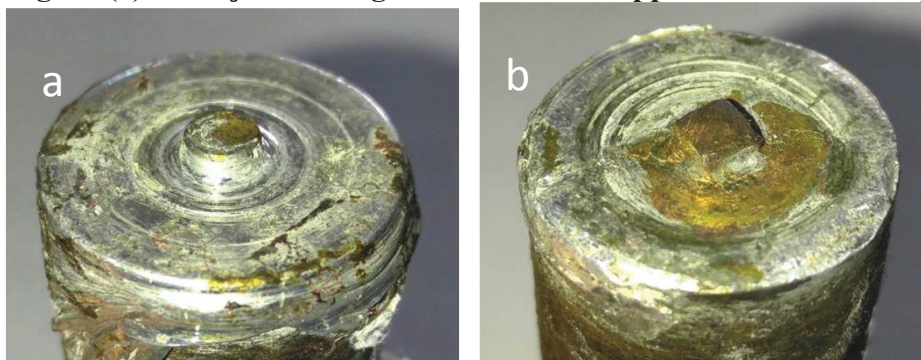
The probe profiles used. a) Cylindrical probe. b)
